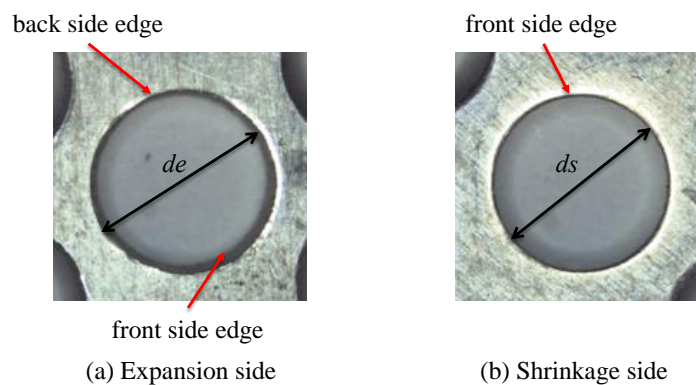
Example photos of hole shape of perforated metal plate. The material is aluminum alloy. The diameter of hole on expansion side is  $d_e=4.74\text{mm}$ , the diameter of hole on shrinkage side is  $d_s=4.43\text{mm}$ .
